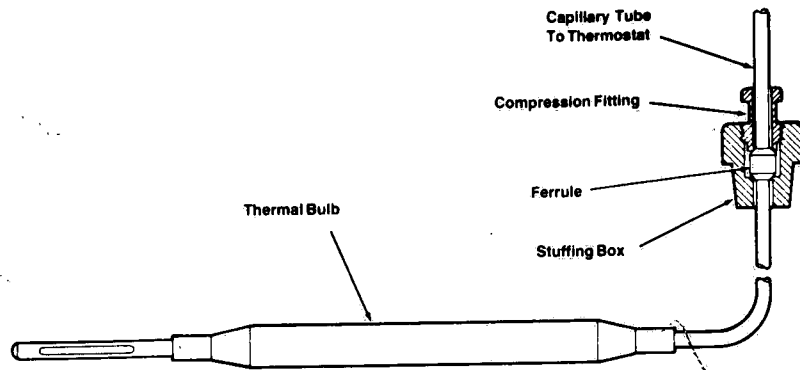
SECURING CAPILLARY TUBE IN BOTTOM OF CHAMBER.
